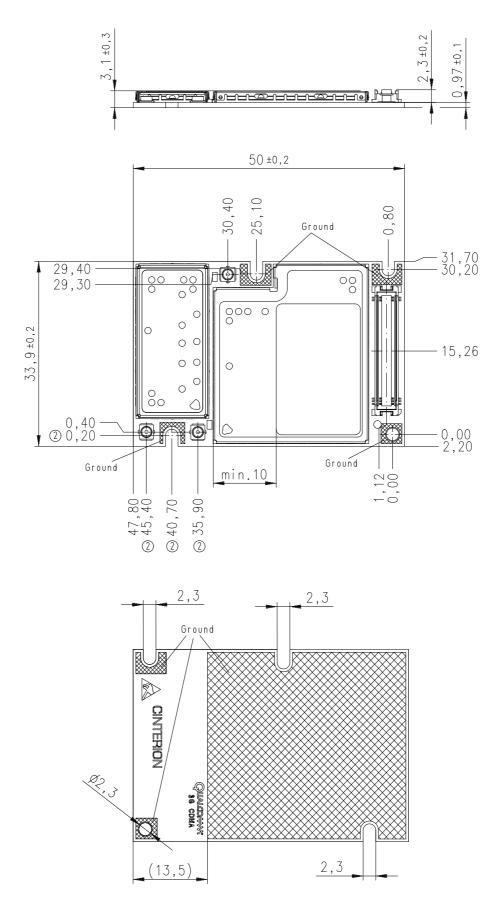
Dimensions of PH8/PH8-P (all dimensions in mm)
